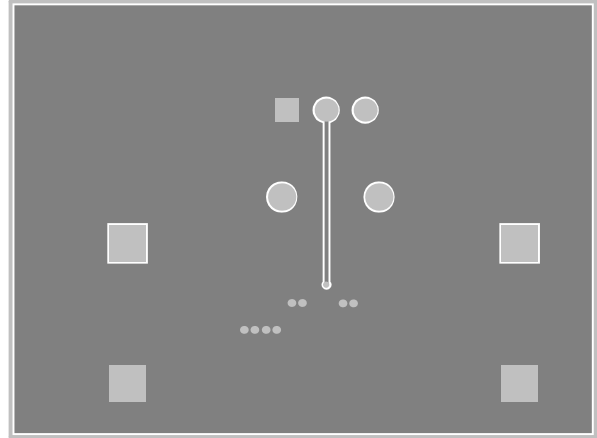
SKY84632 Evaluation Board PCB Bottom Side
